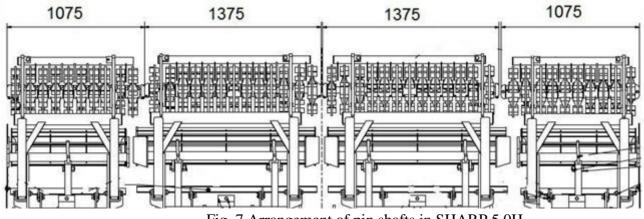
Arrangement of pin shafts in SHARP 5.0H
